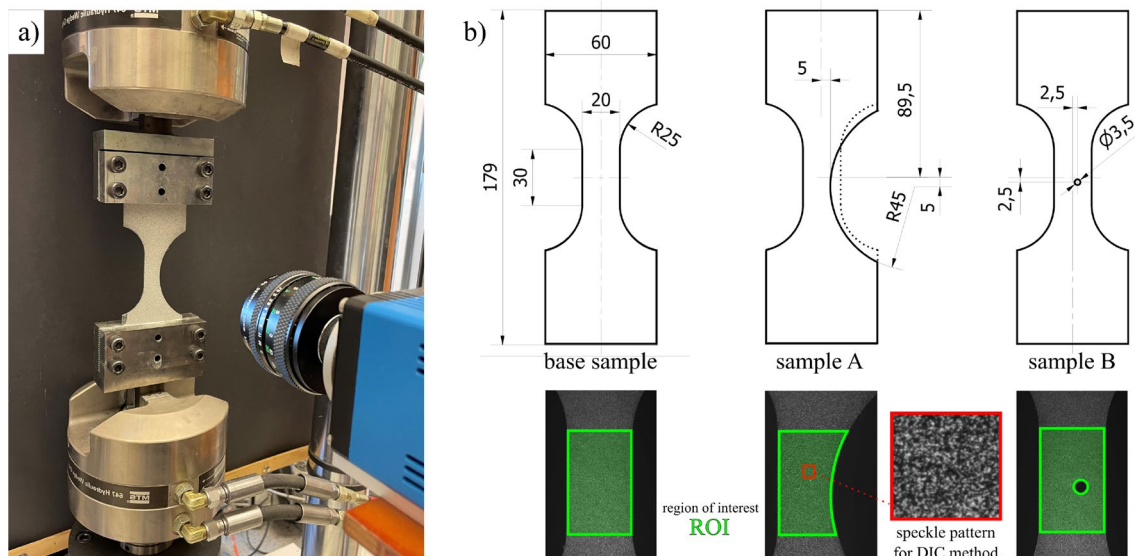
a Experimental setup consisting of MTS testing machine and visible range camera; b geometry and dimensions of tested samples together with speckle pattern and region of interest (ROI) used in DIC method
